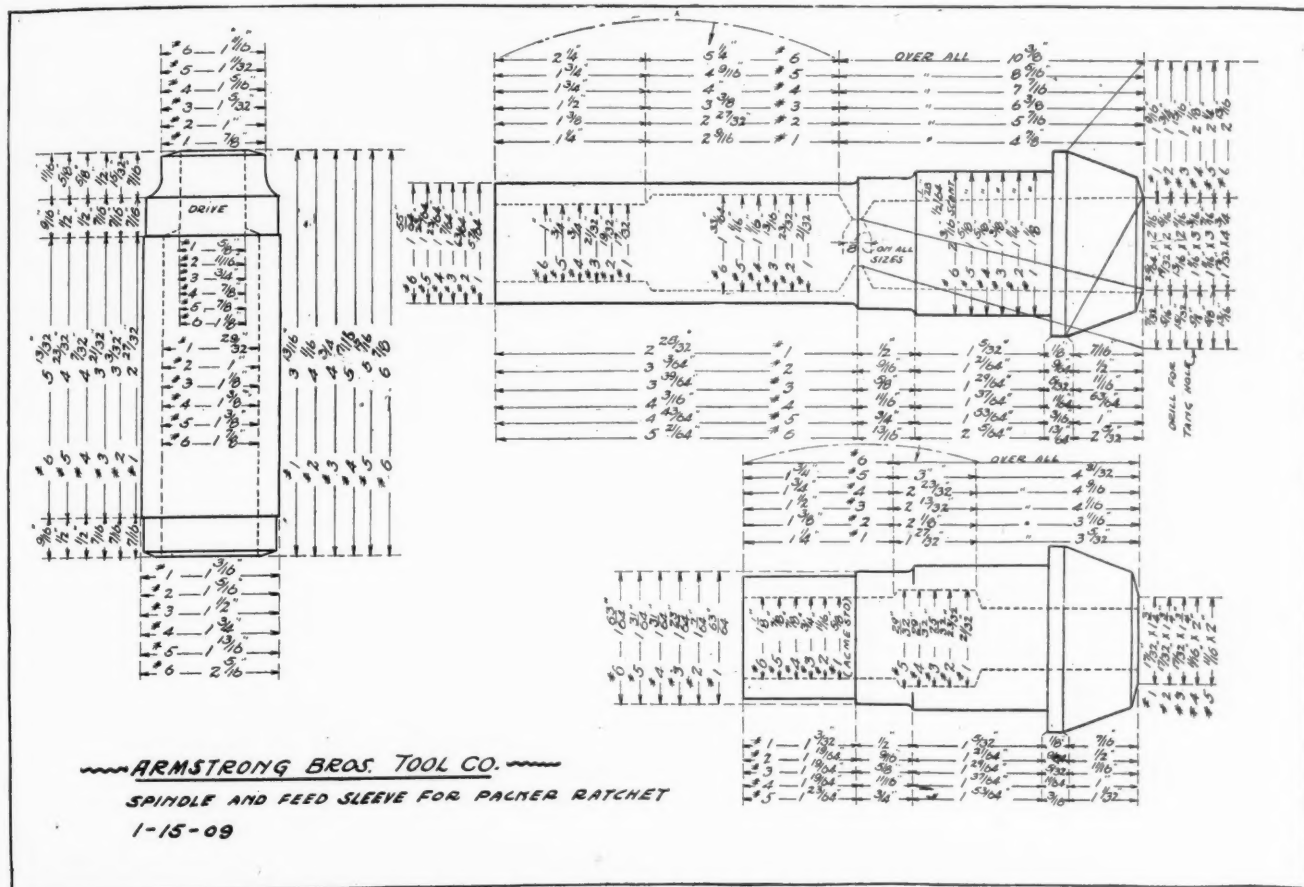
Drawing giving Dimensions of Six Different Sizes of Spindle and Feed Sleeves
